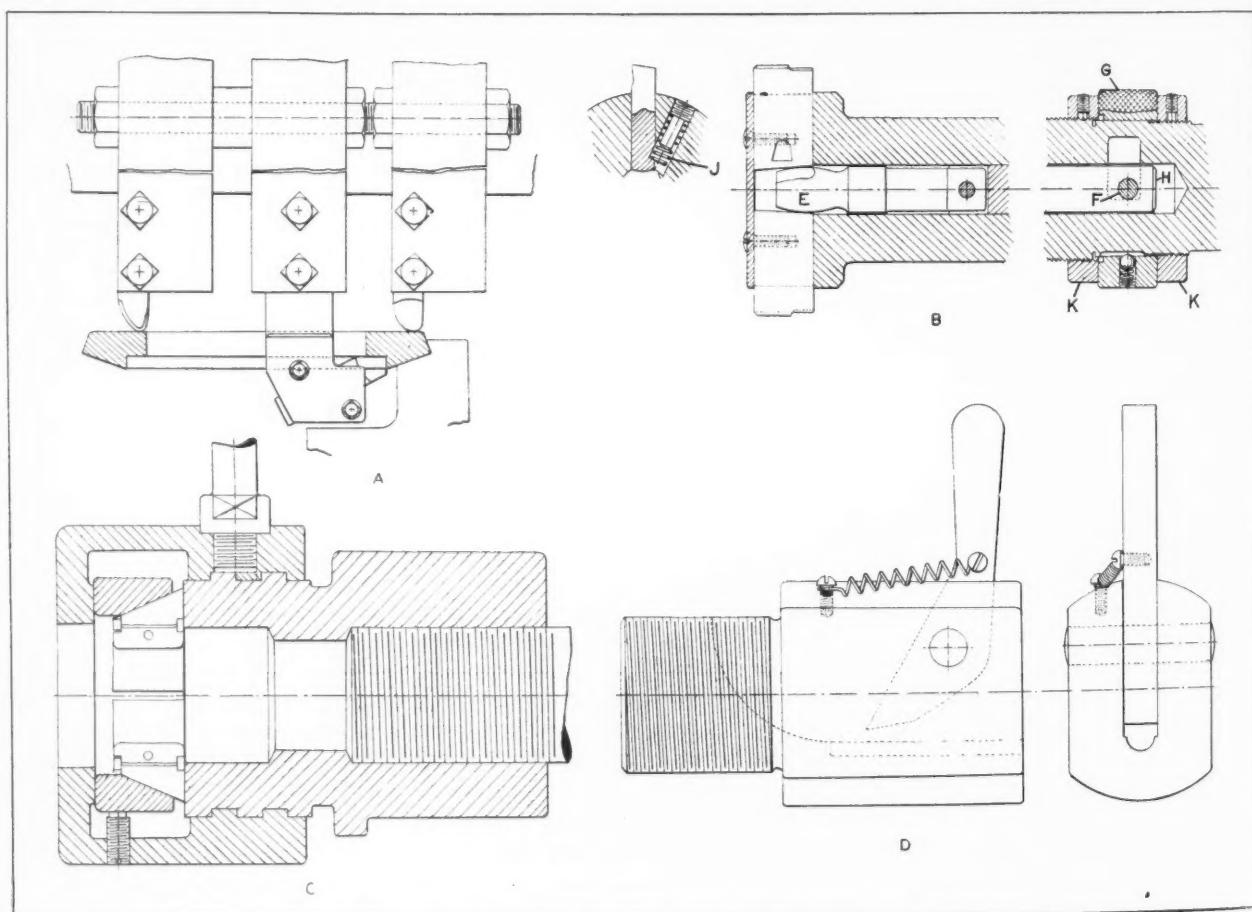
(A) Tool-bar Equipped with Tie-bolts; (B) Floating Collapsible Reamer; (C) Quick-acting Holder for Broaching Machine; (D) Holder with Latch Device for Small Broaches
